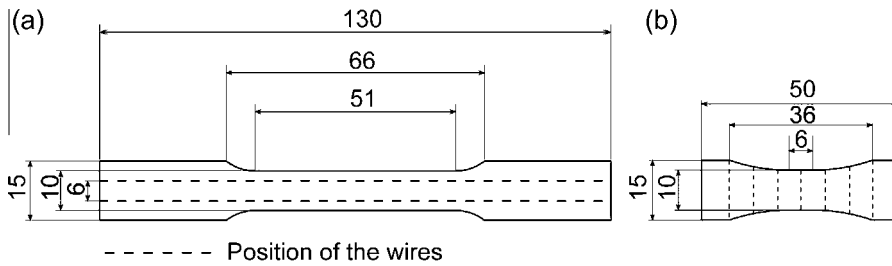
Specimen geometry of SWRA for tensile tests (a) in wire direction (b) perpendicular to wire direction.
